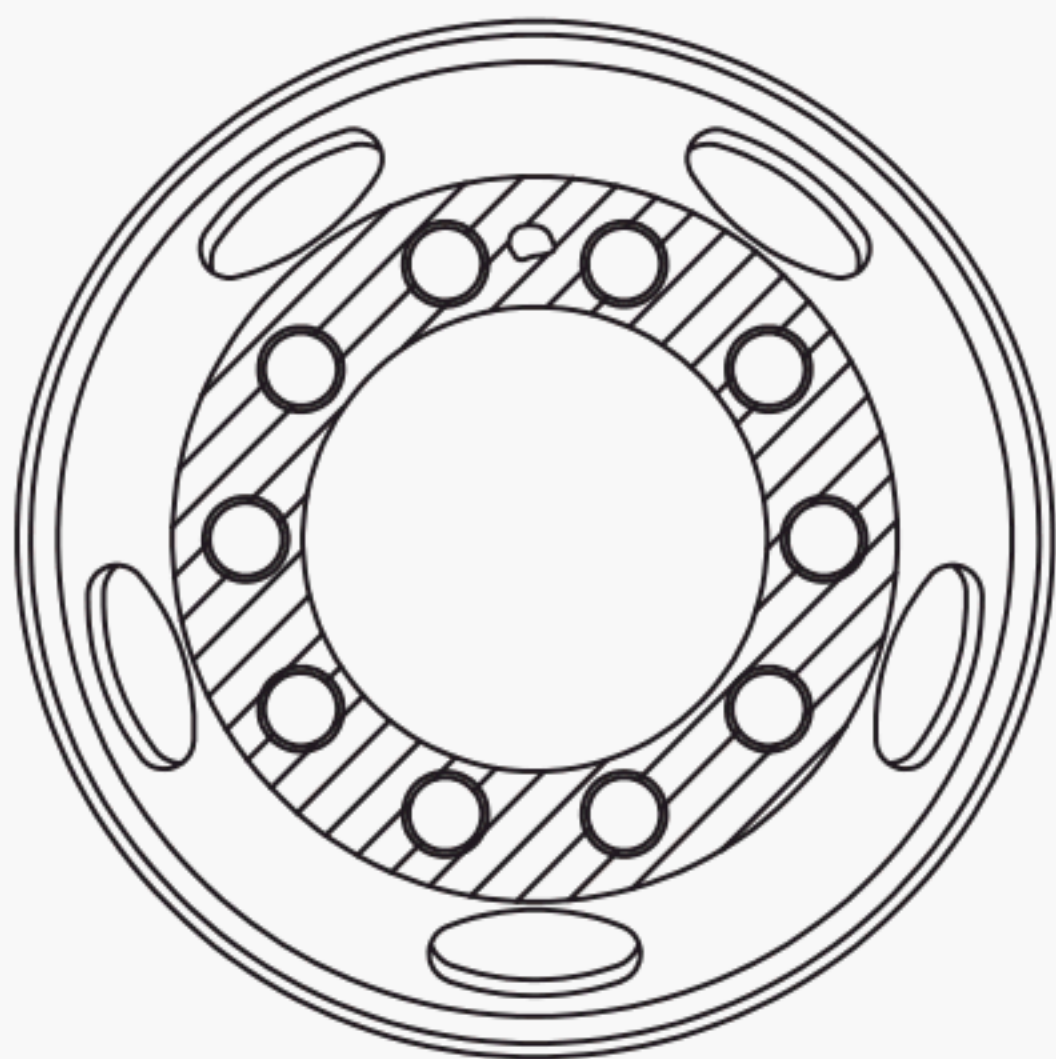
Excessive wear/ corrosion of wheel attachment face
